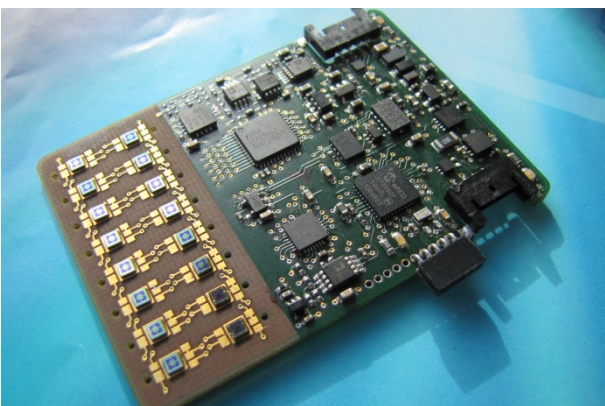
CAN pressure scanner PCB with integrated pressure sensors.
